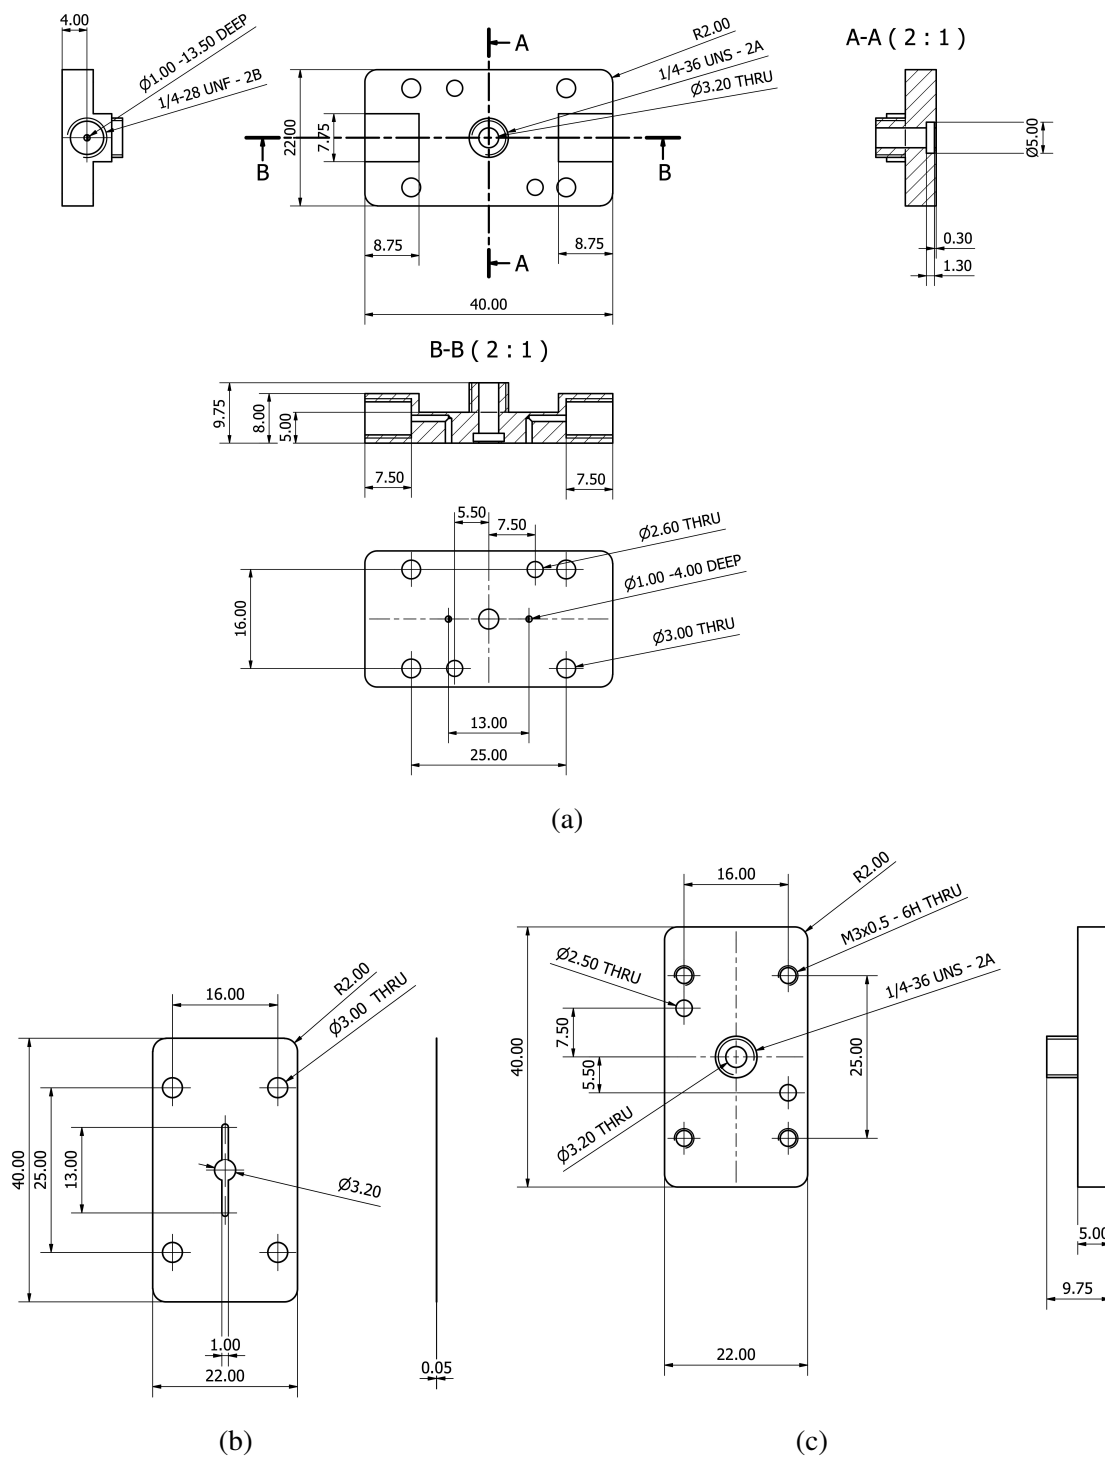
Engineering drawings of device 3. (a) Top layer; (b) Middle layer (PTFE gasket); (c) Bottom layer. Dimensions are in millimetres.
